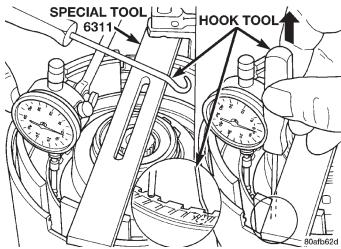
Use Hook Tool to Raise One Clutch Disc
